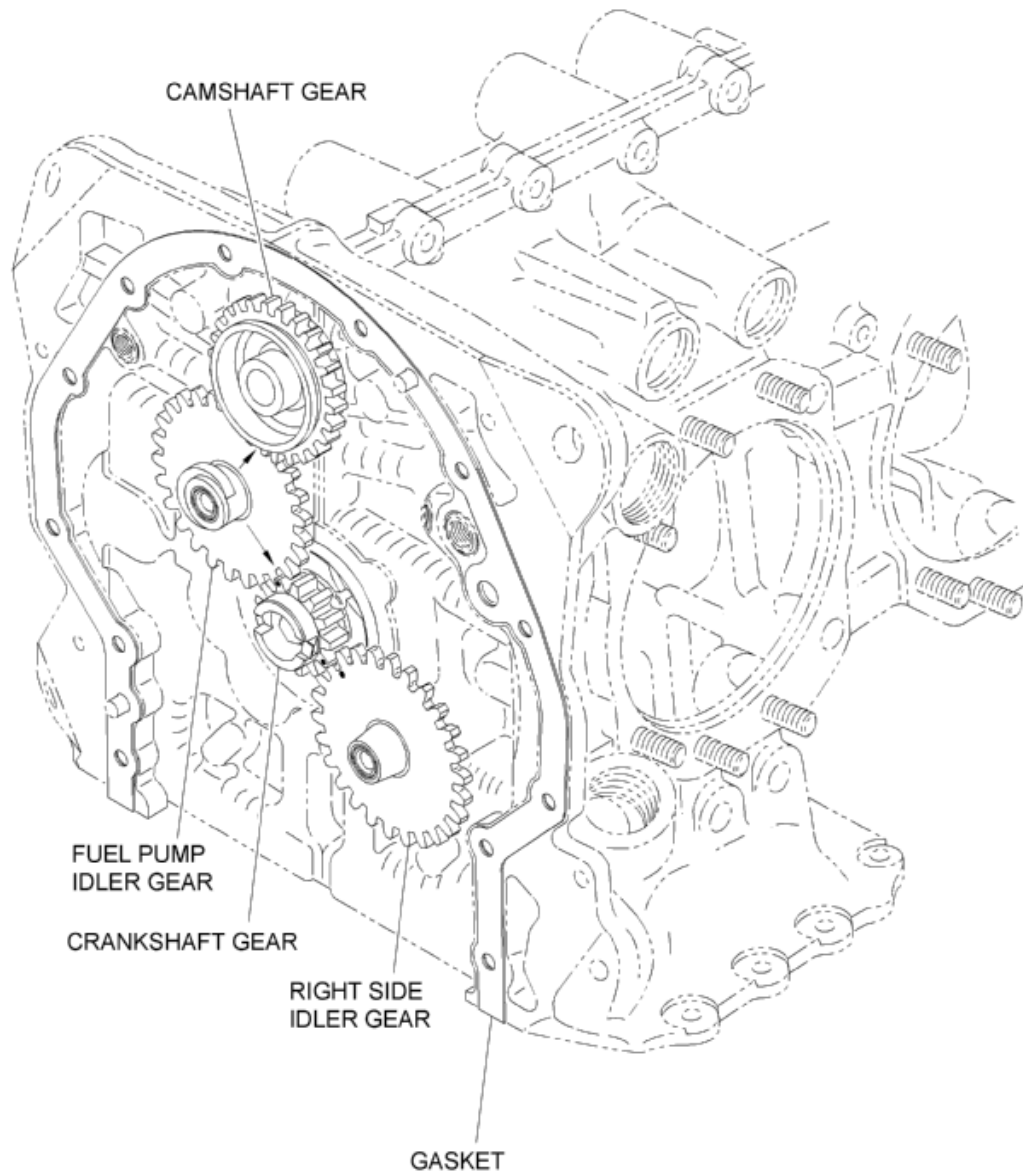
• Accessory Drive Gear Arrangement
